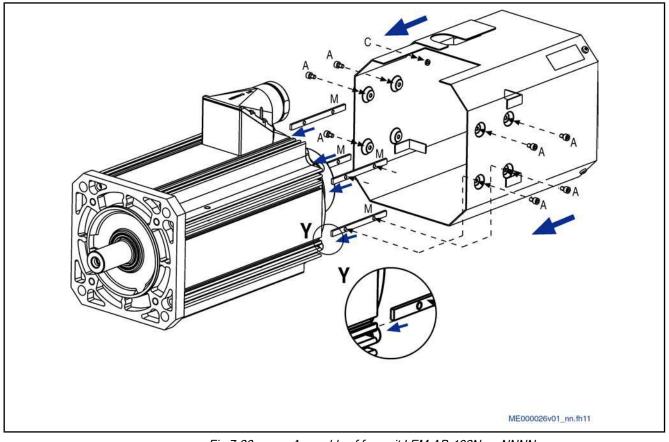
Assembly of fan unit LEM-AB-192N-xx-NNNN
